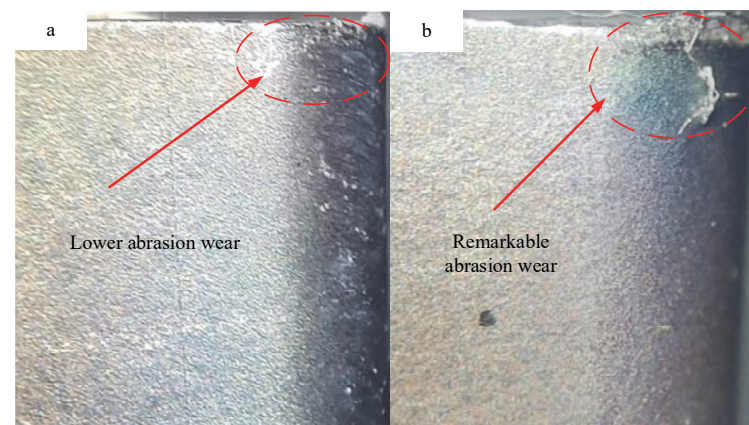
Image of tool wear for (a) LCO2 as a cryogenic cutting fluid and (b) wet machining [58].
